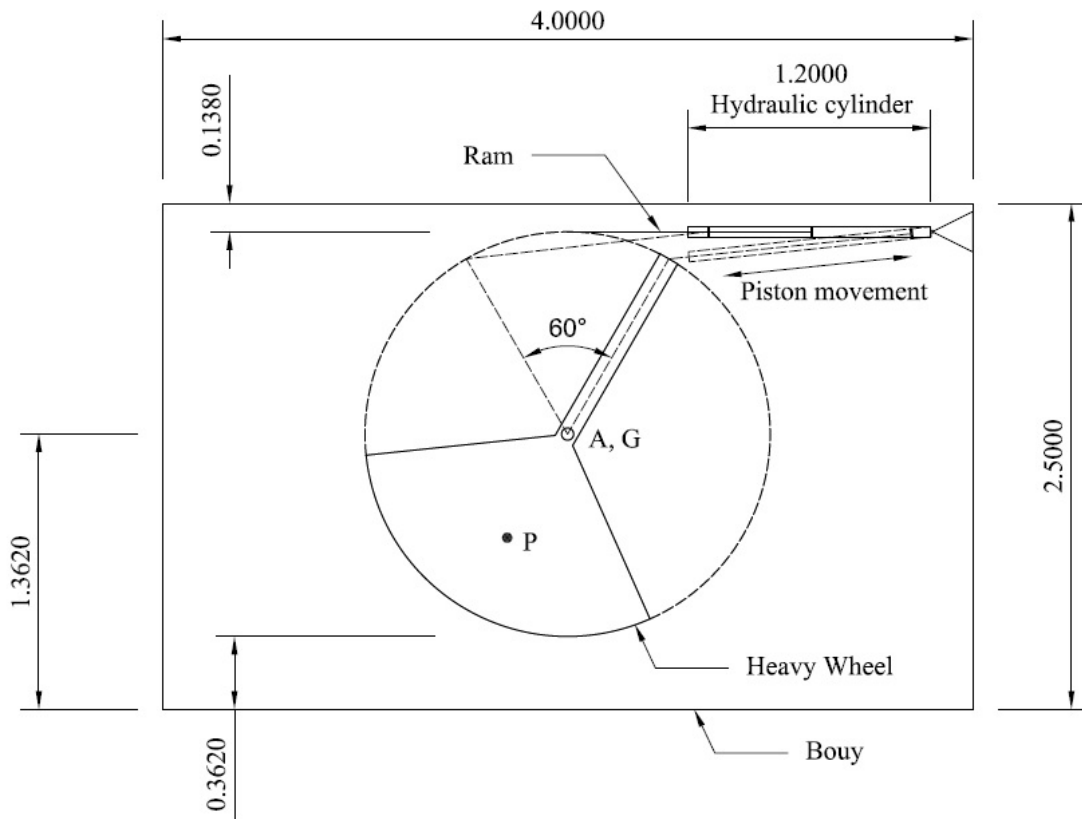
Arrangement of the inner pendulum wheel (WEC-2) with dimensions in the unit of meter
